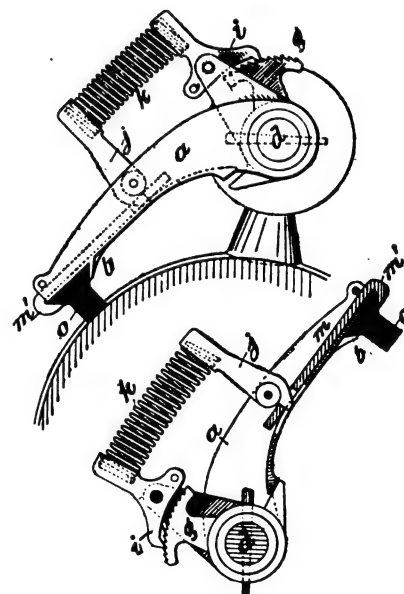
COMMUTATOR BRUSH HOLDER.
